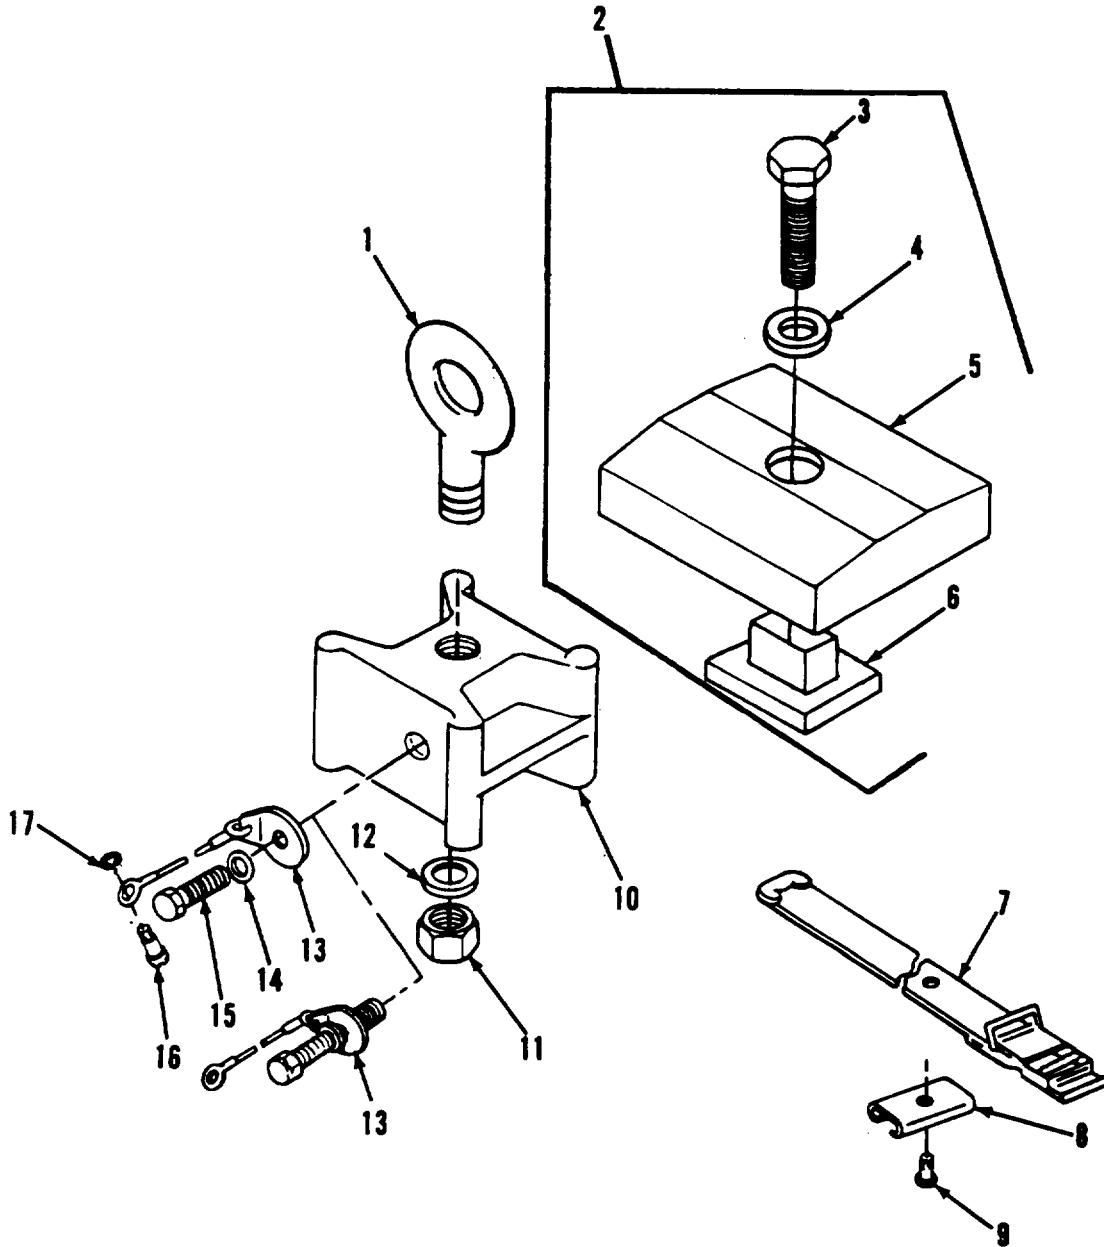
TRANSPORTER CLAMP AND BLOCK (M689, M832).
